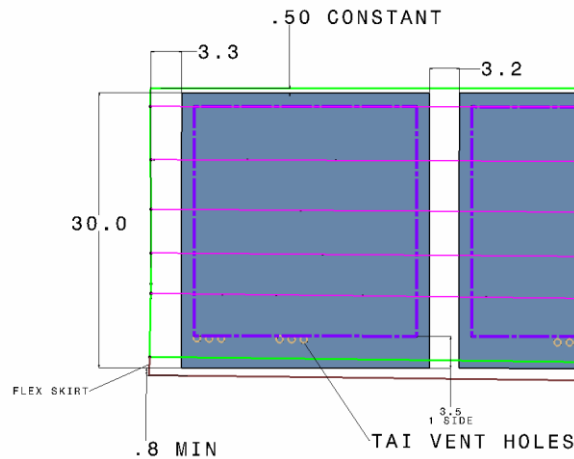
Selected Panel size fitted at the outboard end of slat 9 (Front View)
